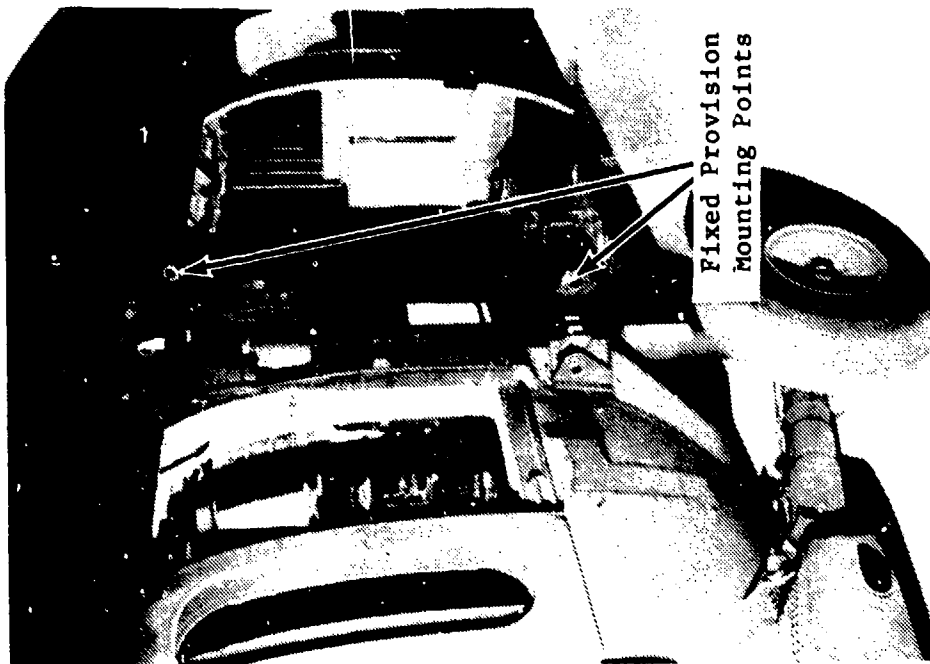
Fixed Provision Mounting Points with Fairings Removed
